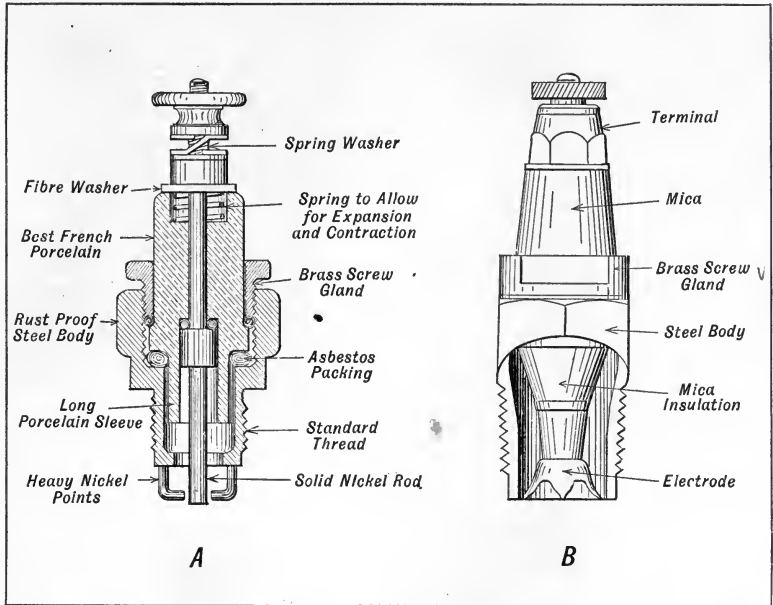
Spark Plug Construction Outlined. A—Sectional View of Porcelain Plug. B—Part Sectional View of Mica Plug.
